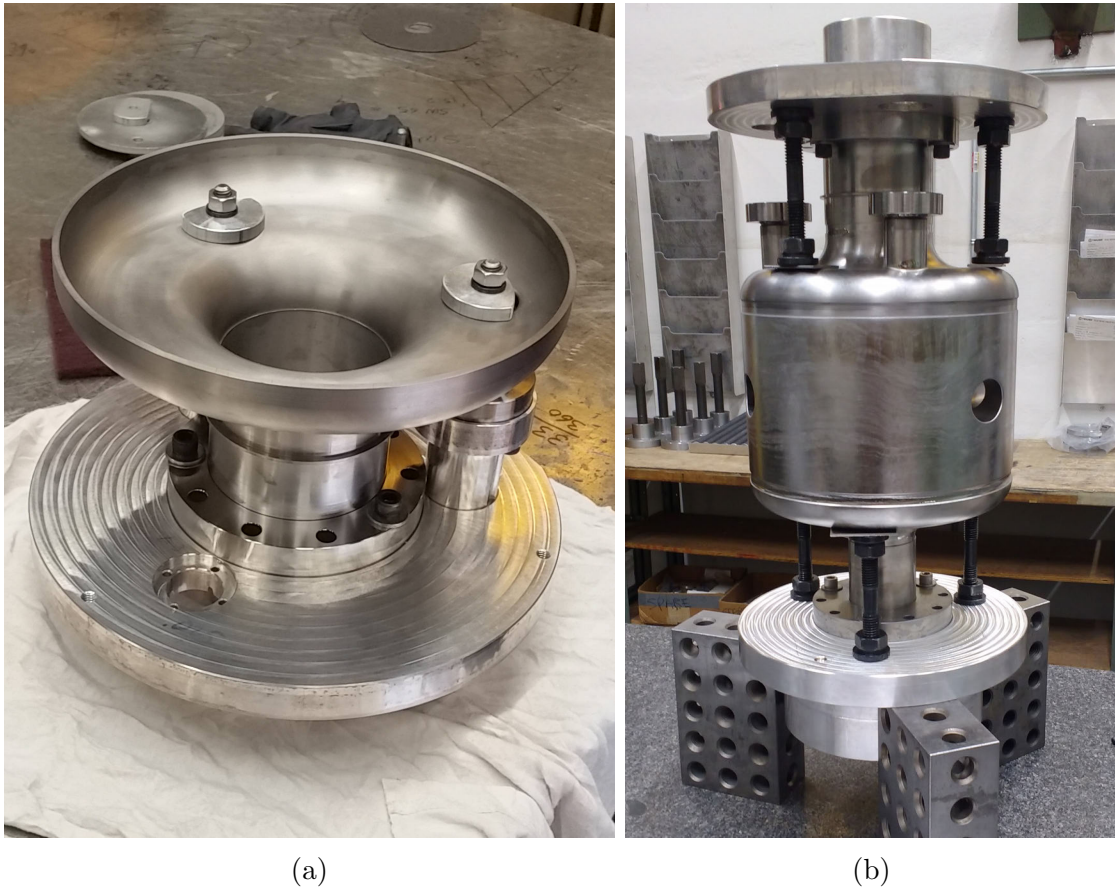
The weld fixtures used during welding the cavity: a) the end cap fixture, shown on the upstream assembly, and b) the fixture used for the final welds.
